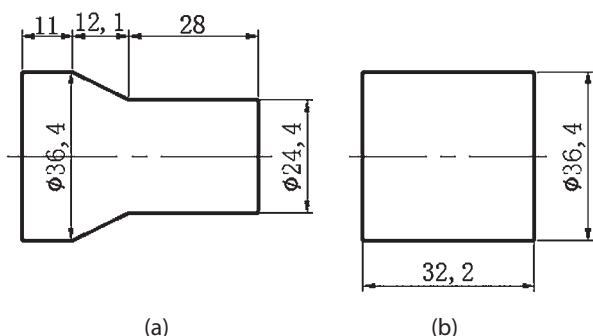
blank: (a) 1/2 CWR blank; (b) 1/2 original blank
